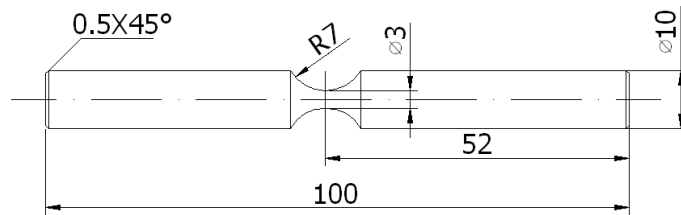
Schematic drawing of hour-glass shape specimen for rotary bending fatigue test (dimensions in mm).
